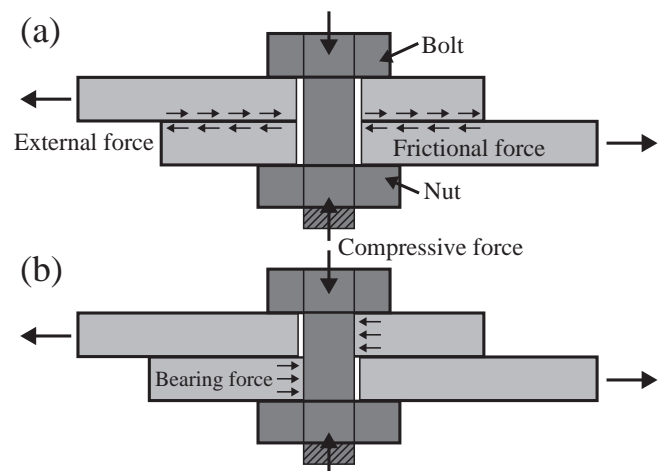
Fastening method (a) Friction joint (b) Bearing joint
